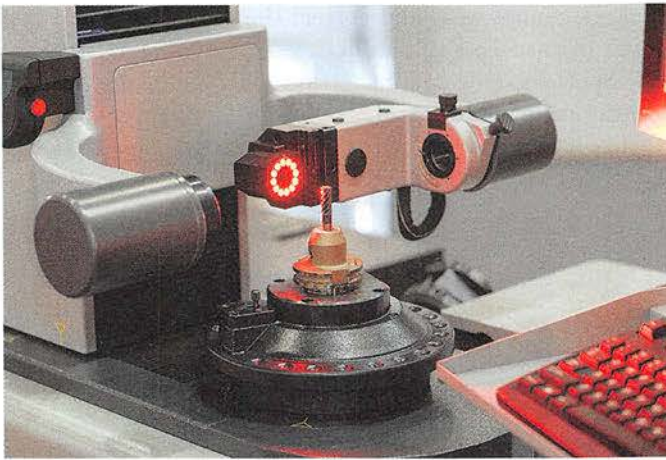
Optical comparator inspection is performed automatically on some machines.
